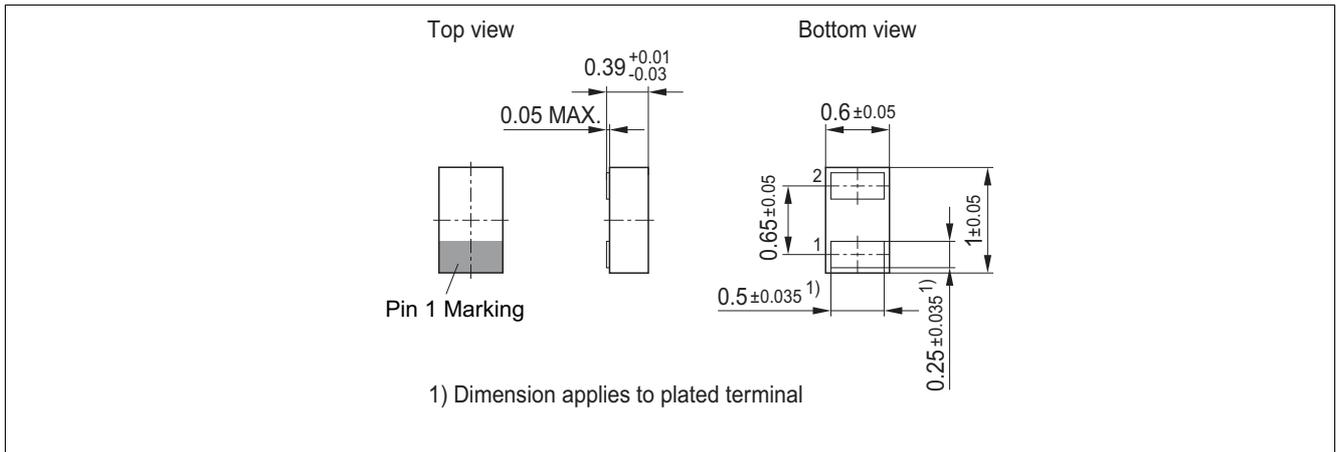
TSLP-2-17 Package outline (dimension in mm)
